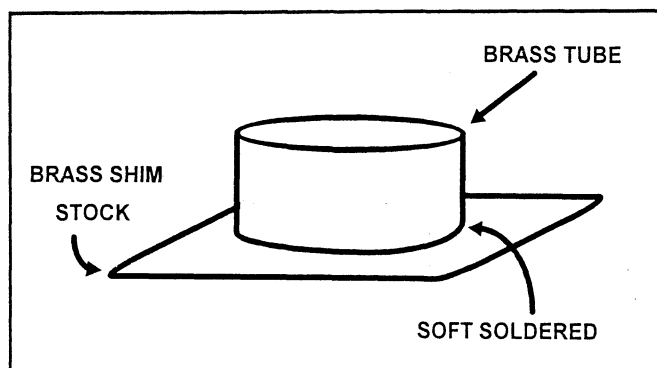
Quick and dirty cavity for prototyping. Telescoping brass tubing is soldered to brass shim stock as two nesting pieces. Concentric tubes yield a quick prototype of coaxial or reentrant cavities.
